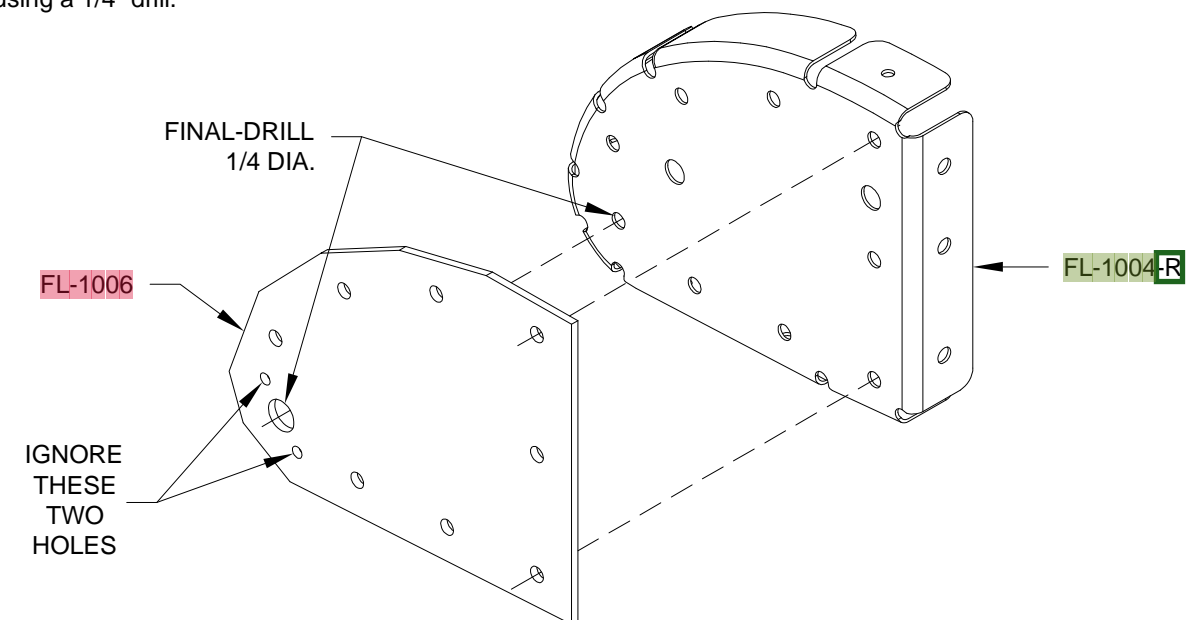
INBOARD ROD END RIB SUBASSEMBLY
